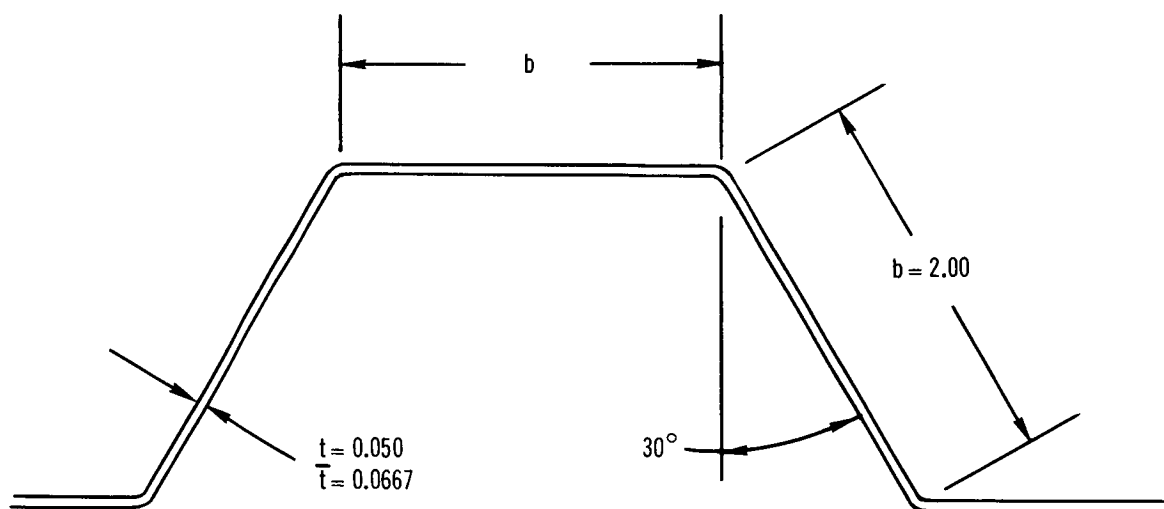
Beam Shear Web ($b/t = 40$) Center Section
